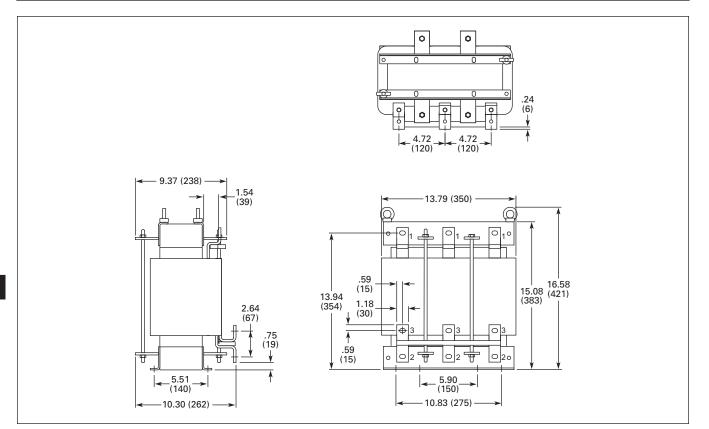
Dimensions of AC Choke CHK0400 in Inches (mm)
